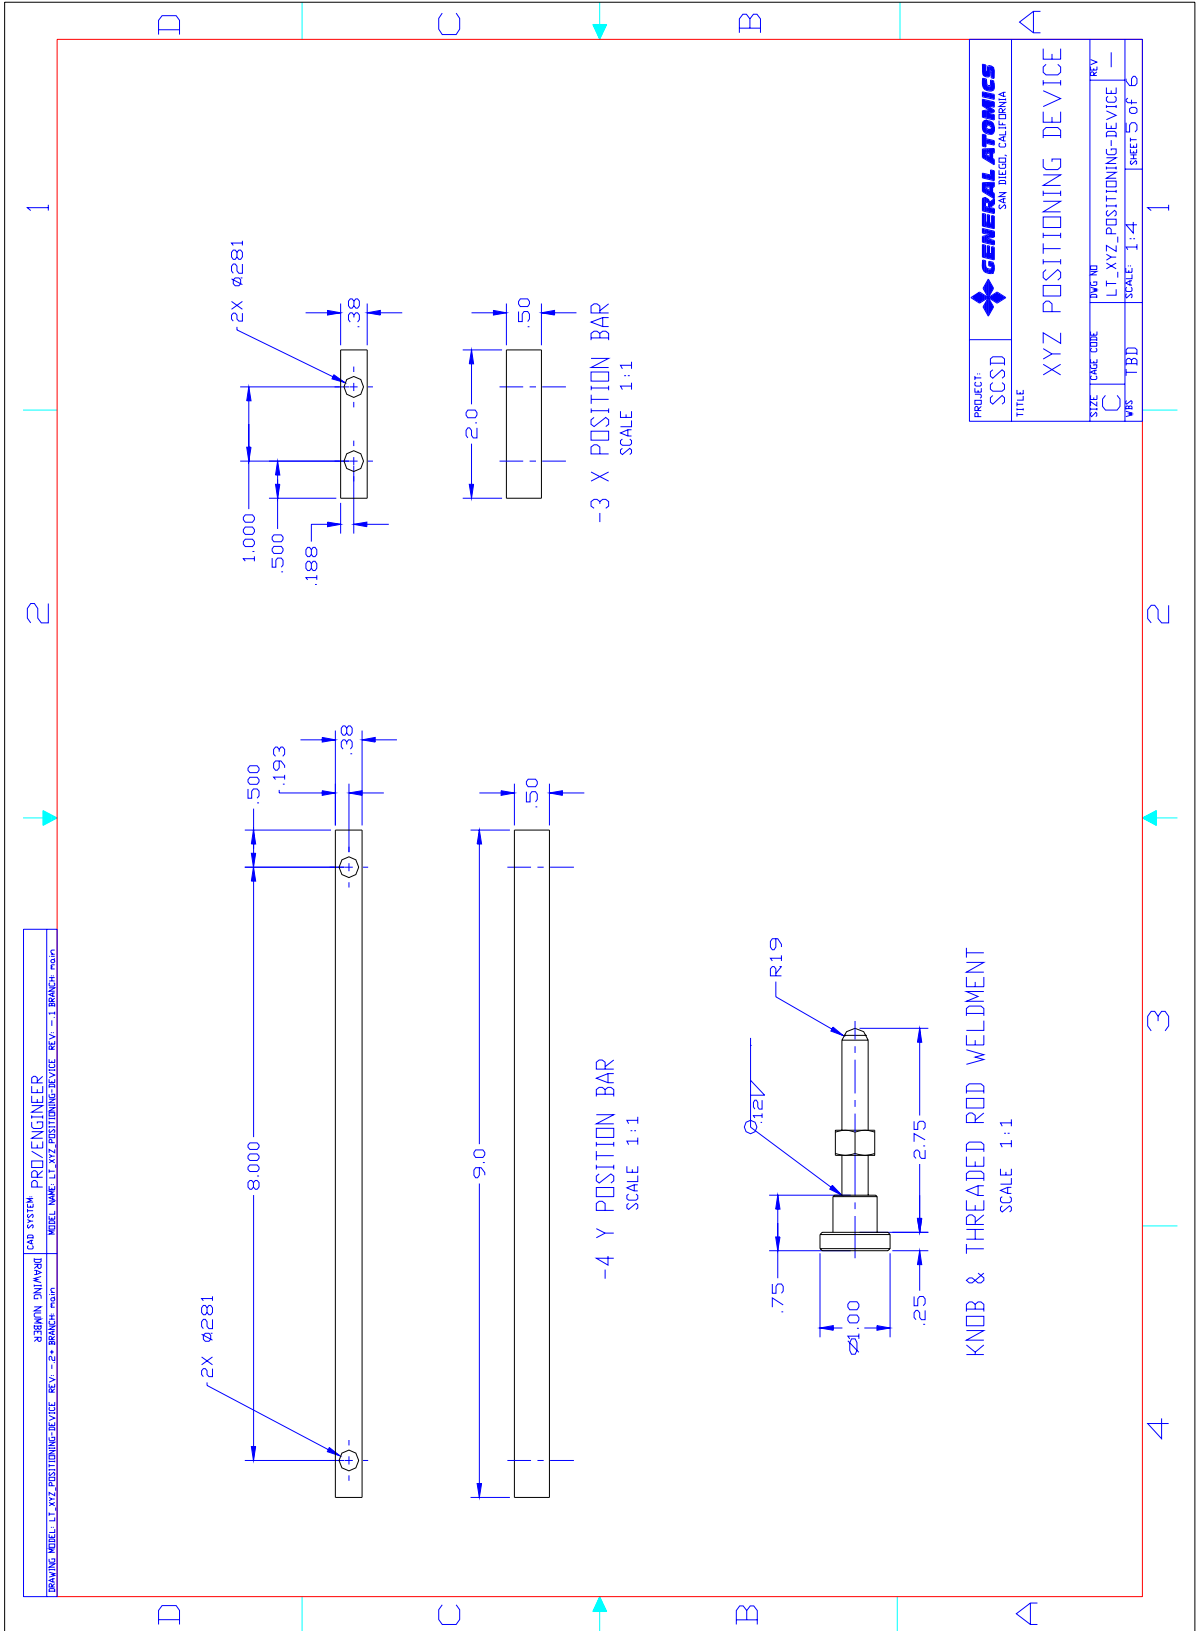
Machine Drawings of X and Y Position Bars and Threaded Ball-End Screw Assembly.
